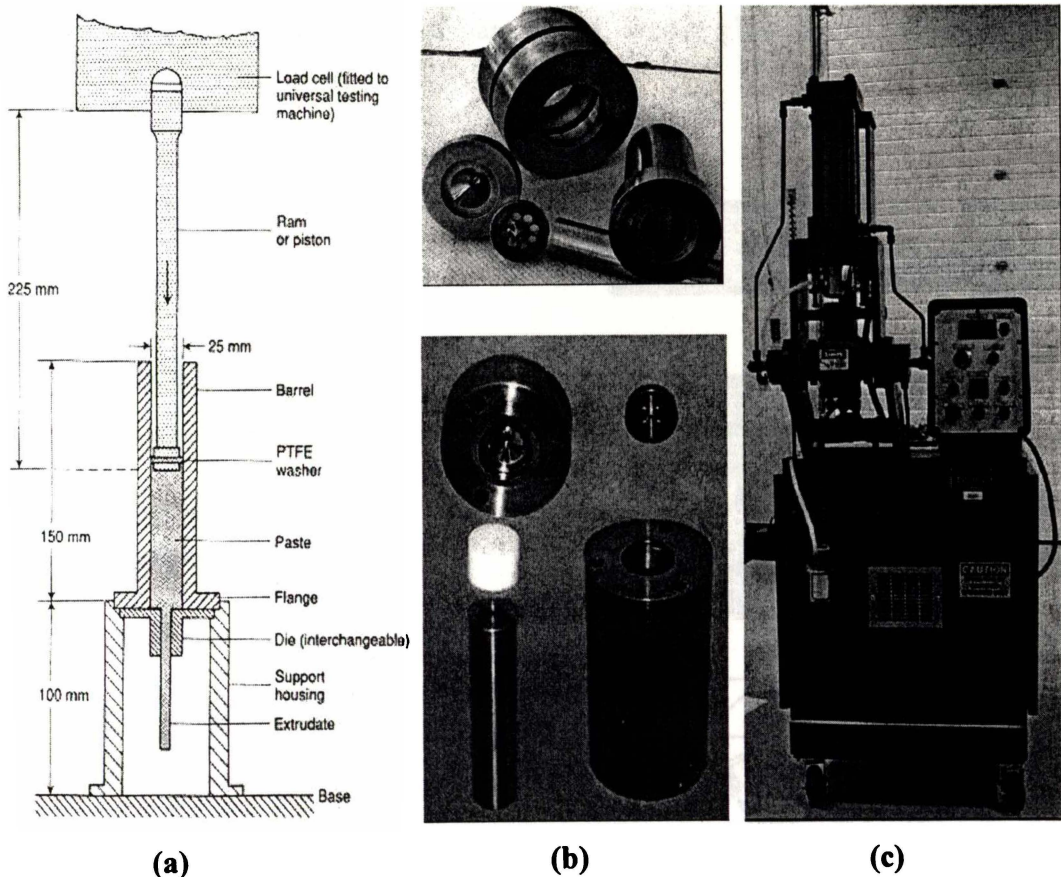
Extrusion Equipment Used: (a) Illustration of Ram Extrusion Die on a Universal Tester, (b) Photograph of 4-Hole and 8-Hole Extrusion Dies, (c) Ram Extruder (Loomis Products Co.).
